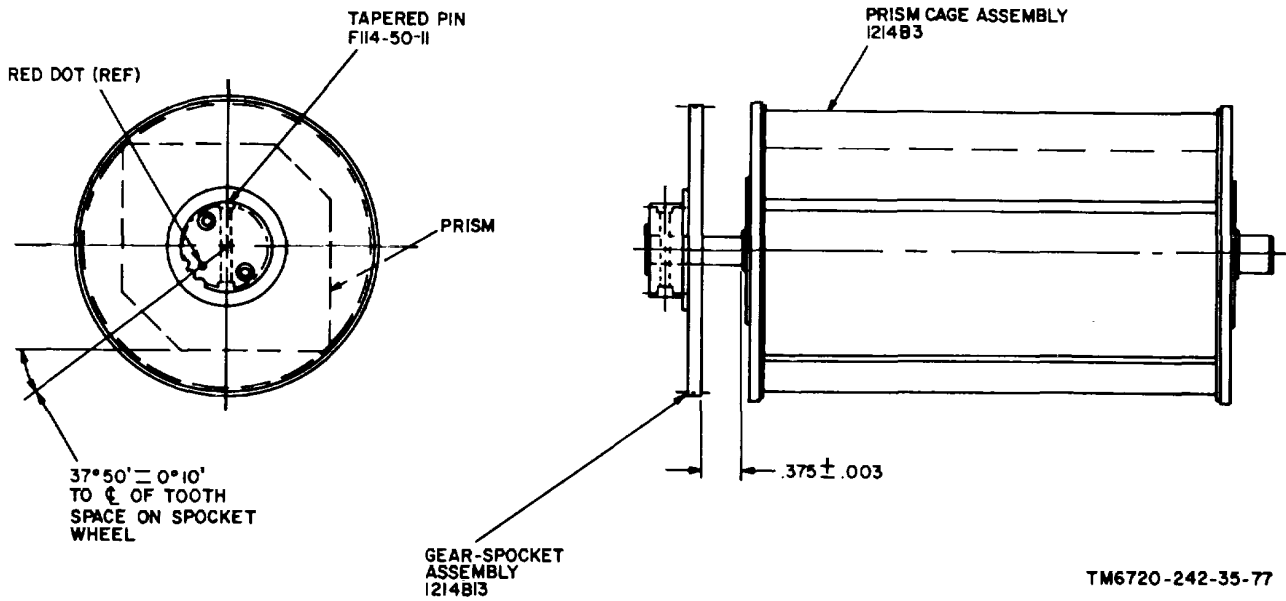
Alinement of prism and helical gear and sprocket assembly.
